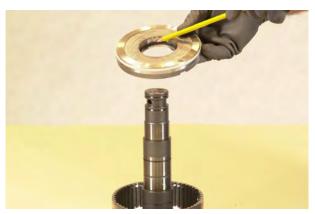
Remove 3rd clutch shaft front bearing thrust washer.
